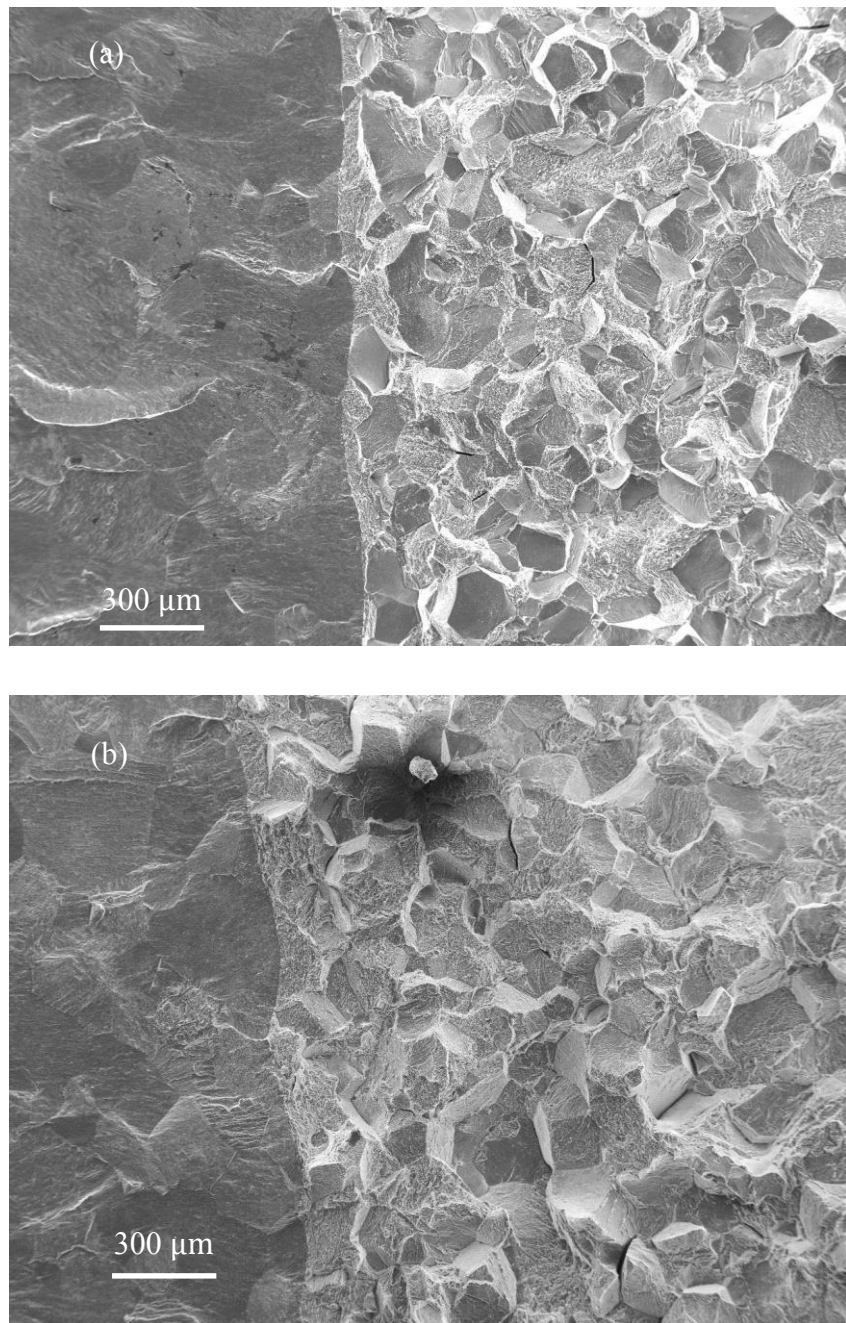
Low magnification fracture surface images, (a) STA1 specimen, (b) SQA1 specimen.
